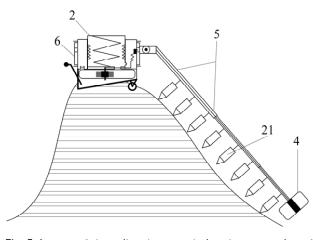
Layout of the soil reclamator during the processing of hills and heaps: 2 – pneumatic cylinder; 4 – running wheel; 5 – bridge; 6 – coupling housing; 21 – controlling element
